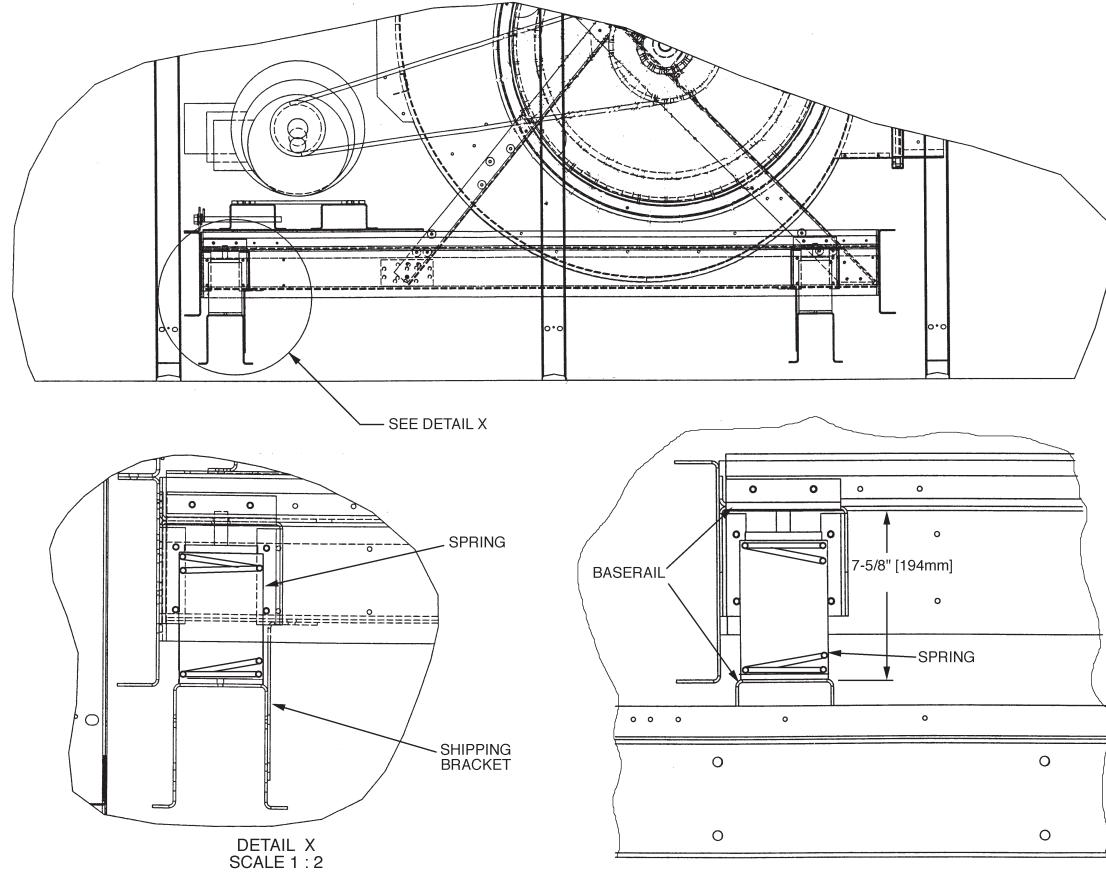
Shipping Brackets; Size 055-070 Units
